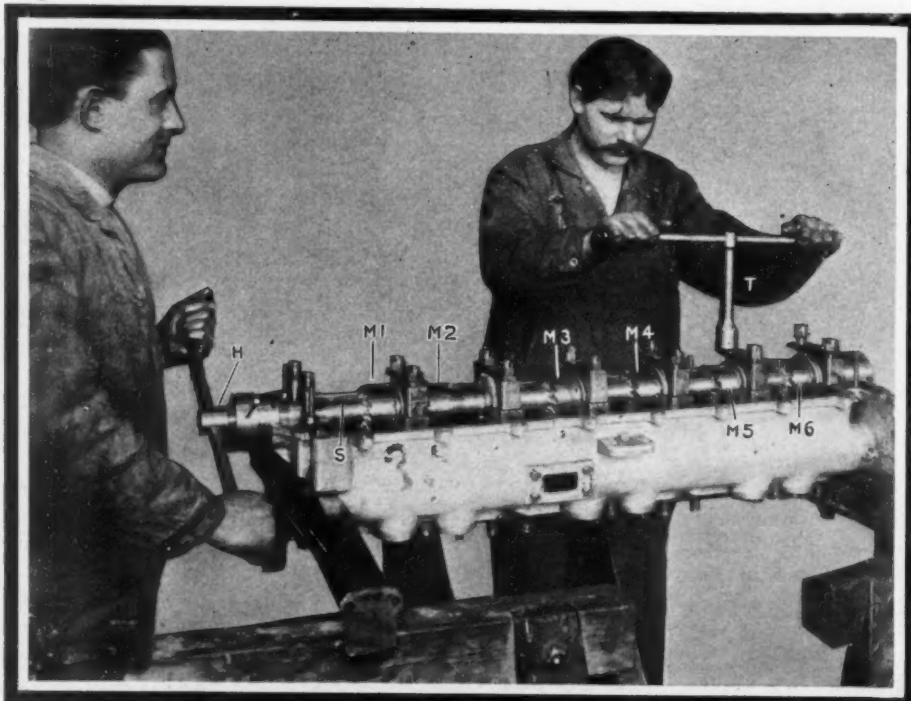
Method of milling the sides of engine bearings to give the required amount of lateral travel to the crankshaft
